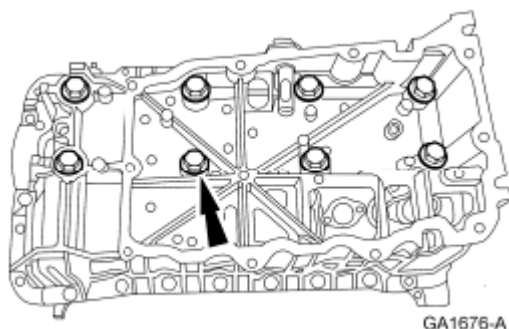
Locating Cylinder Block Cradle Inner Bolts
